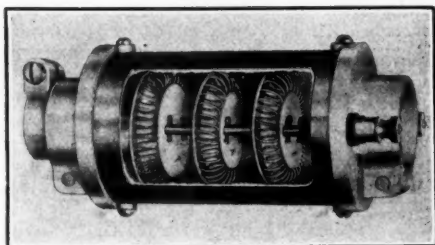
Arnold electric vaporizer with section cut away to show the arrangement of the heating coils
